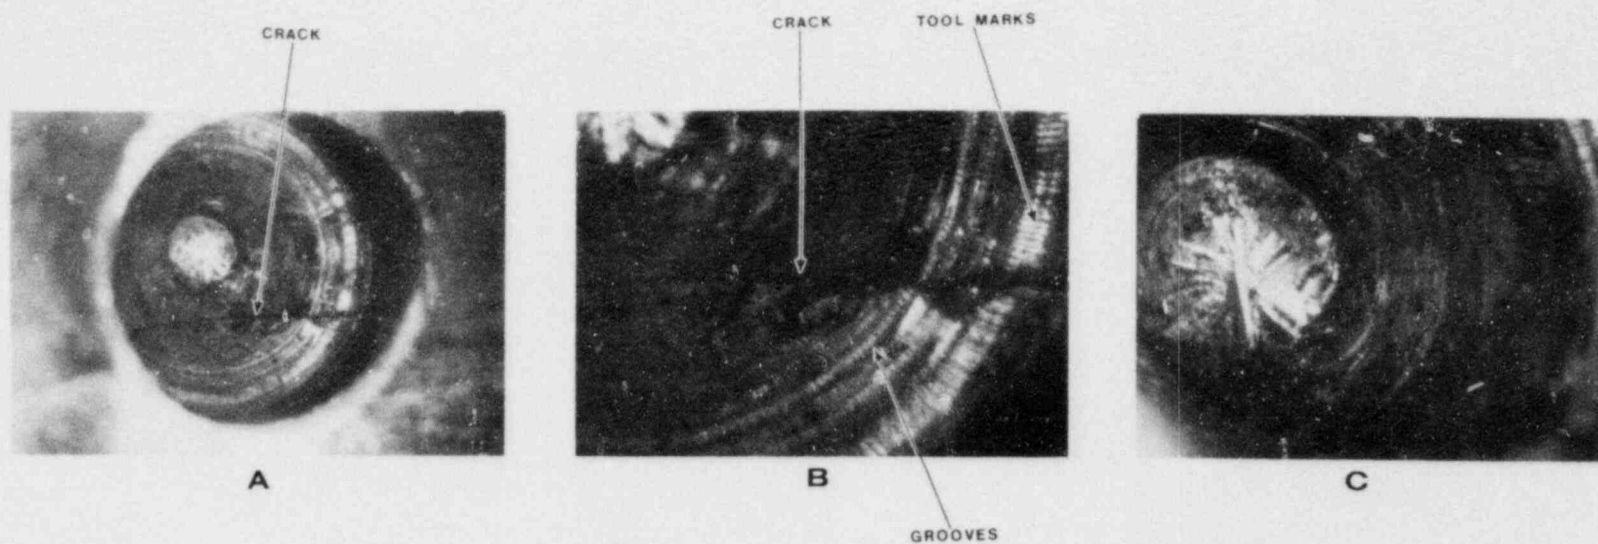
Internal Surface Condition of Cracked Pin Hole
